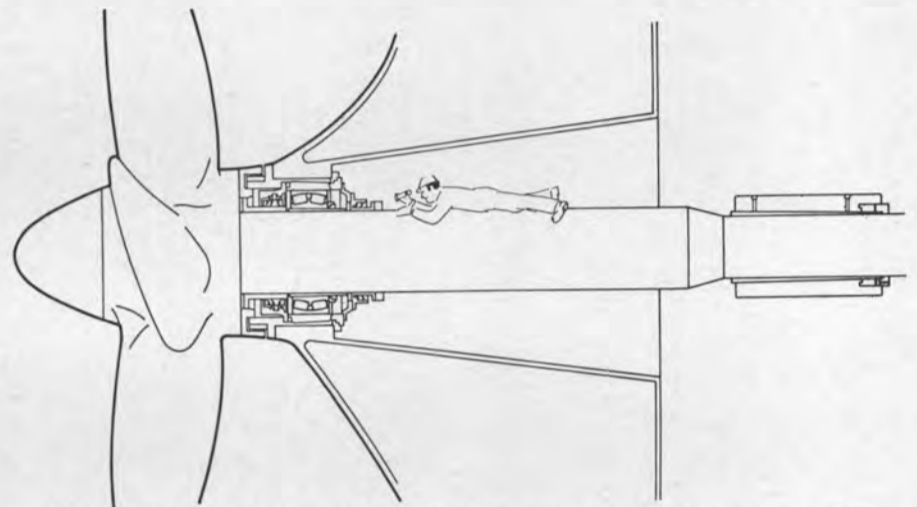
SKF stern-tube bearing and SKF coupling for VLCC propeller shafts.
